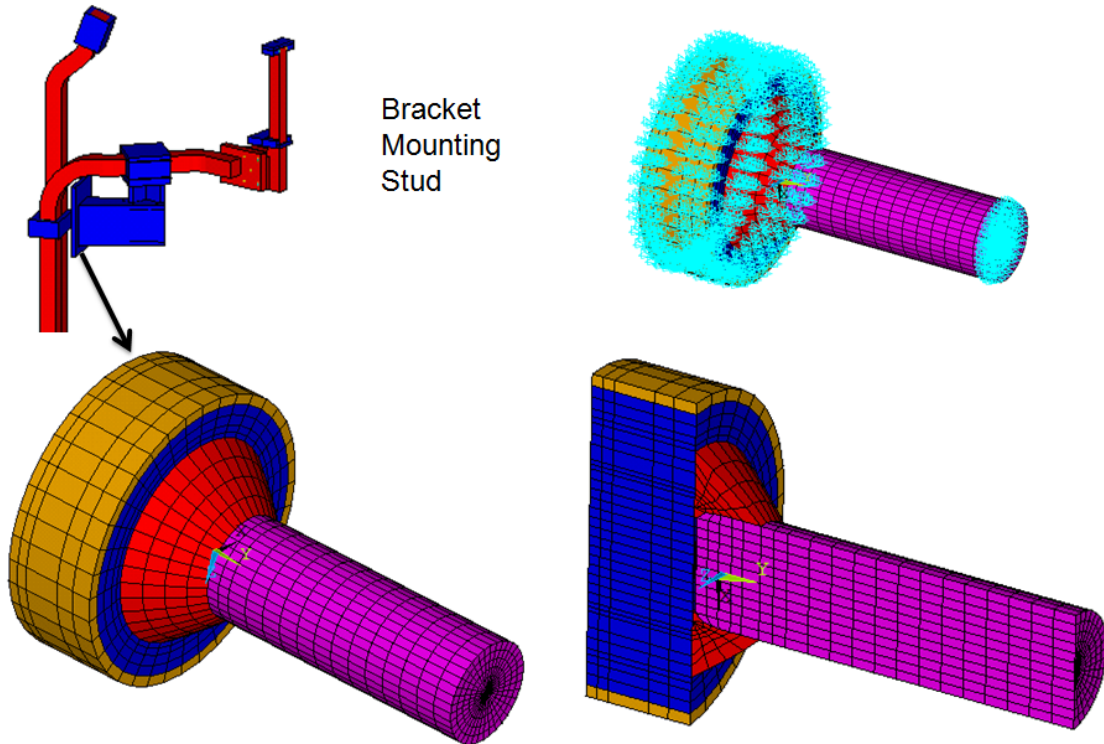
Welded Stud Model) Used in Section 12.2
